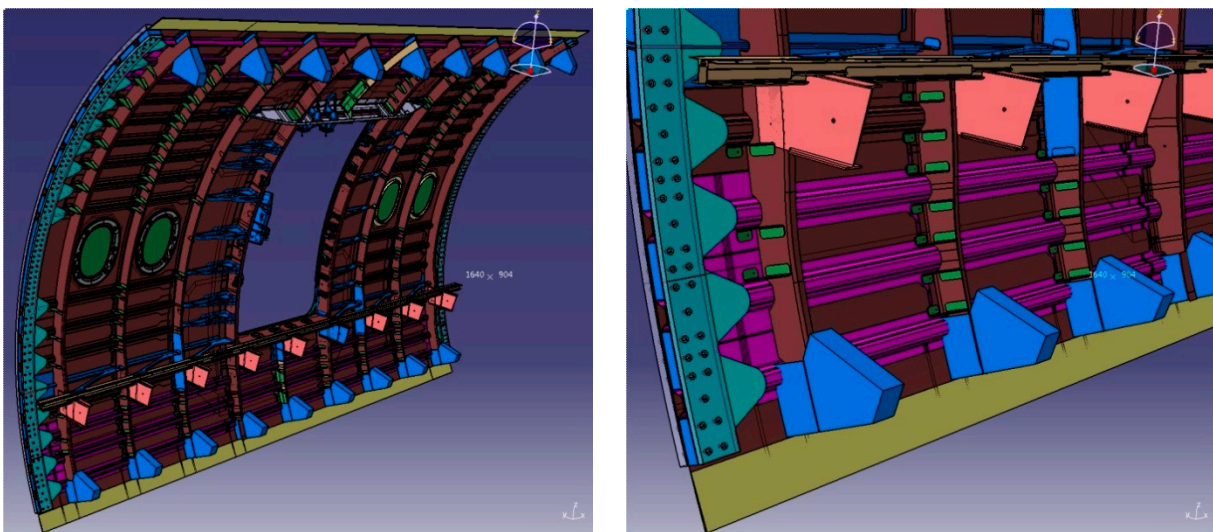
CAD model of the panel, including all the details of its sub-structures and parts, and reinforcements and attachment structures at its free edges to allow for proper load introductions (left). On the right a local view is given of the panel corner showing some of the modelling detail of the skin reinforcement structures at the curved edge.
